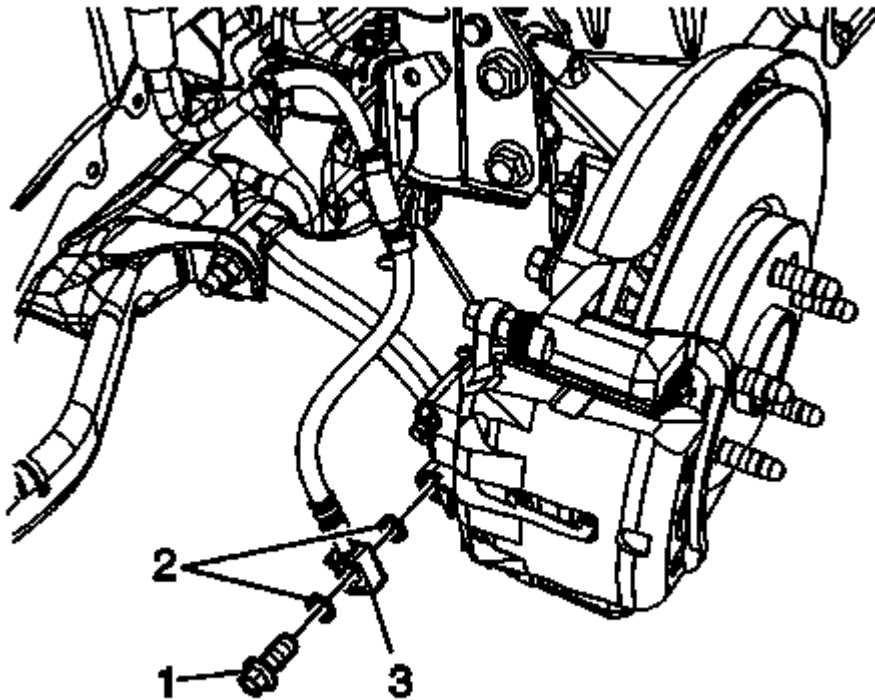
Brake Hose, Fitting Bolt & Fitting Gaskets
